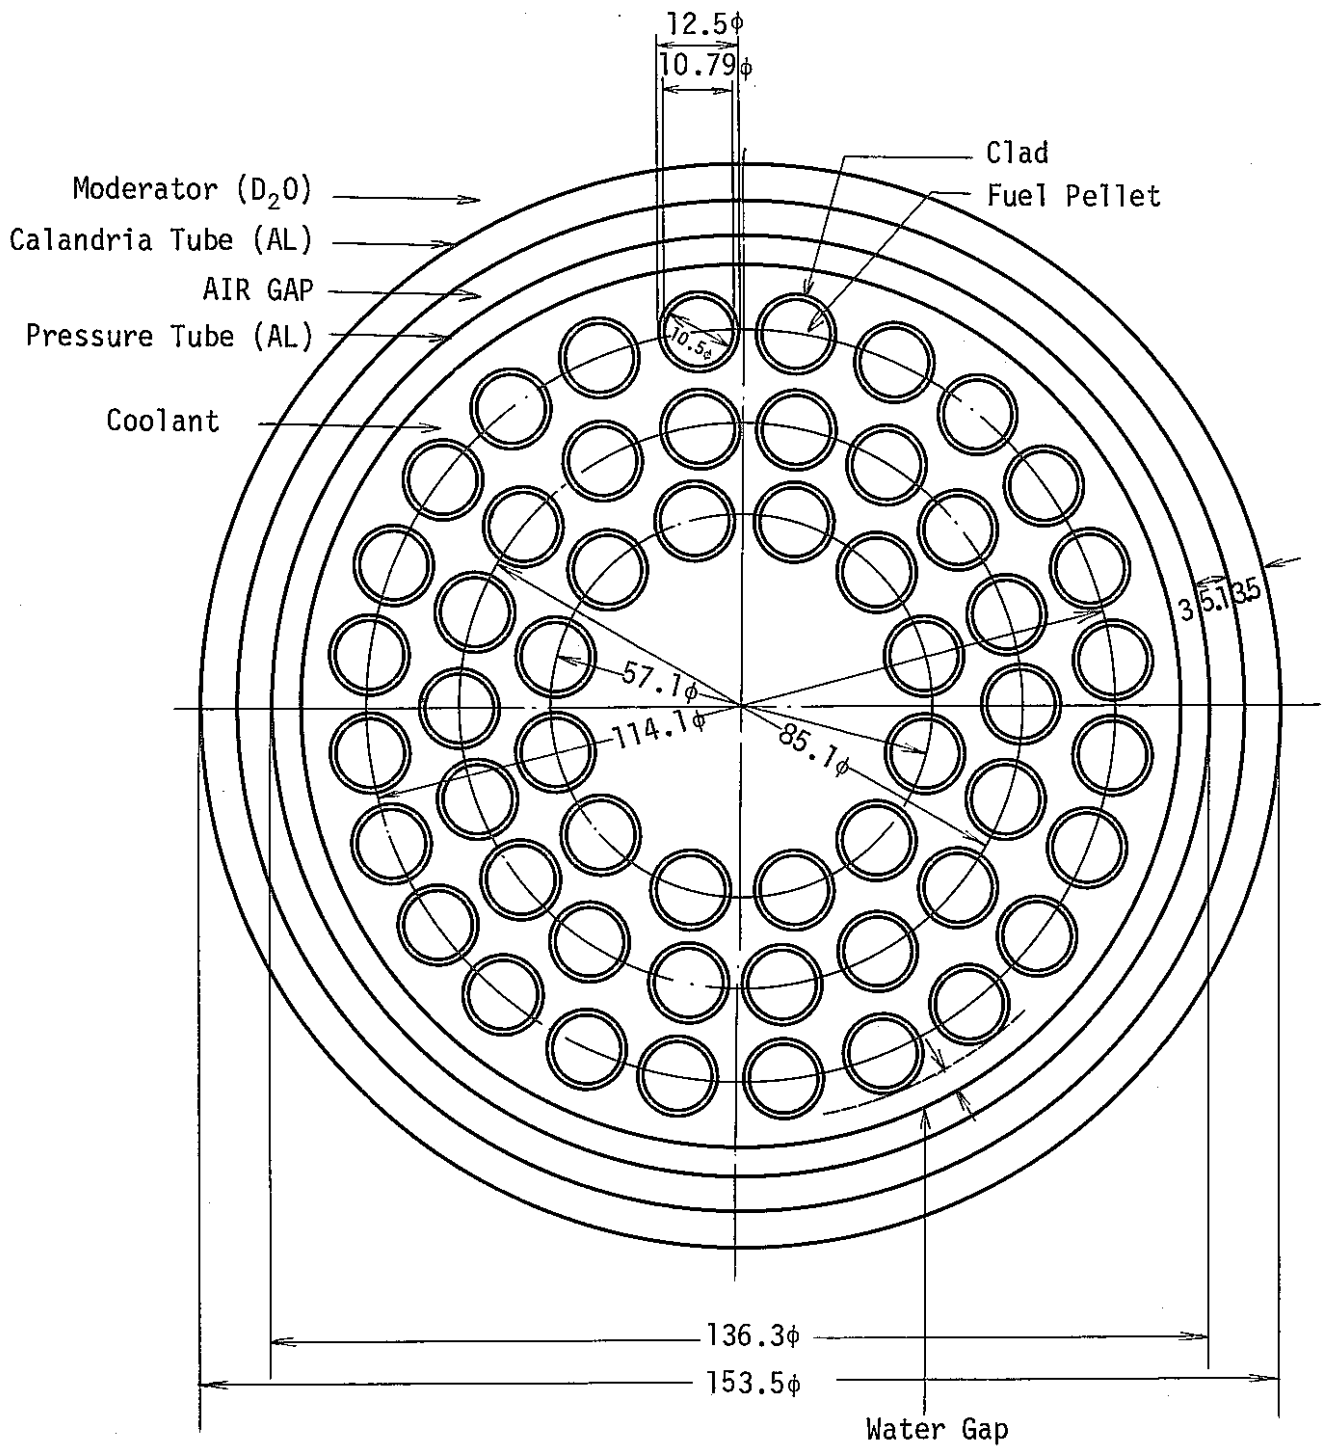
Cross-sectional View of 54-rod Fuel Cluster
